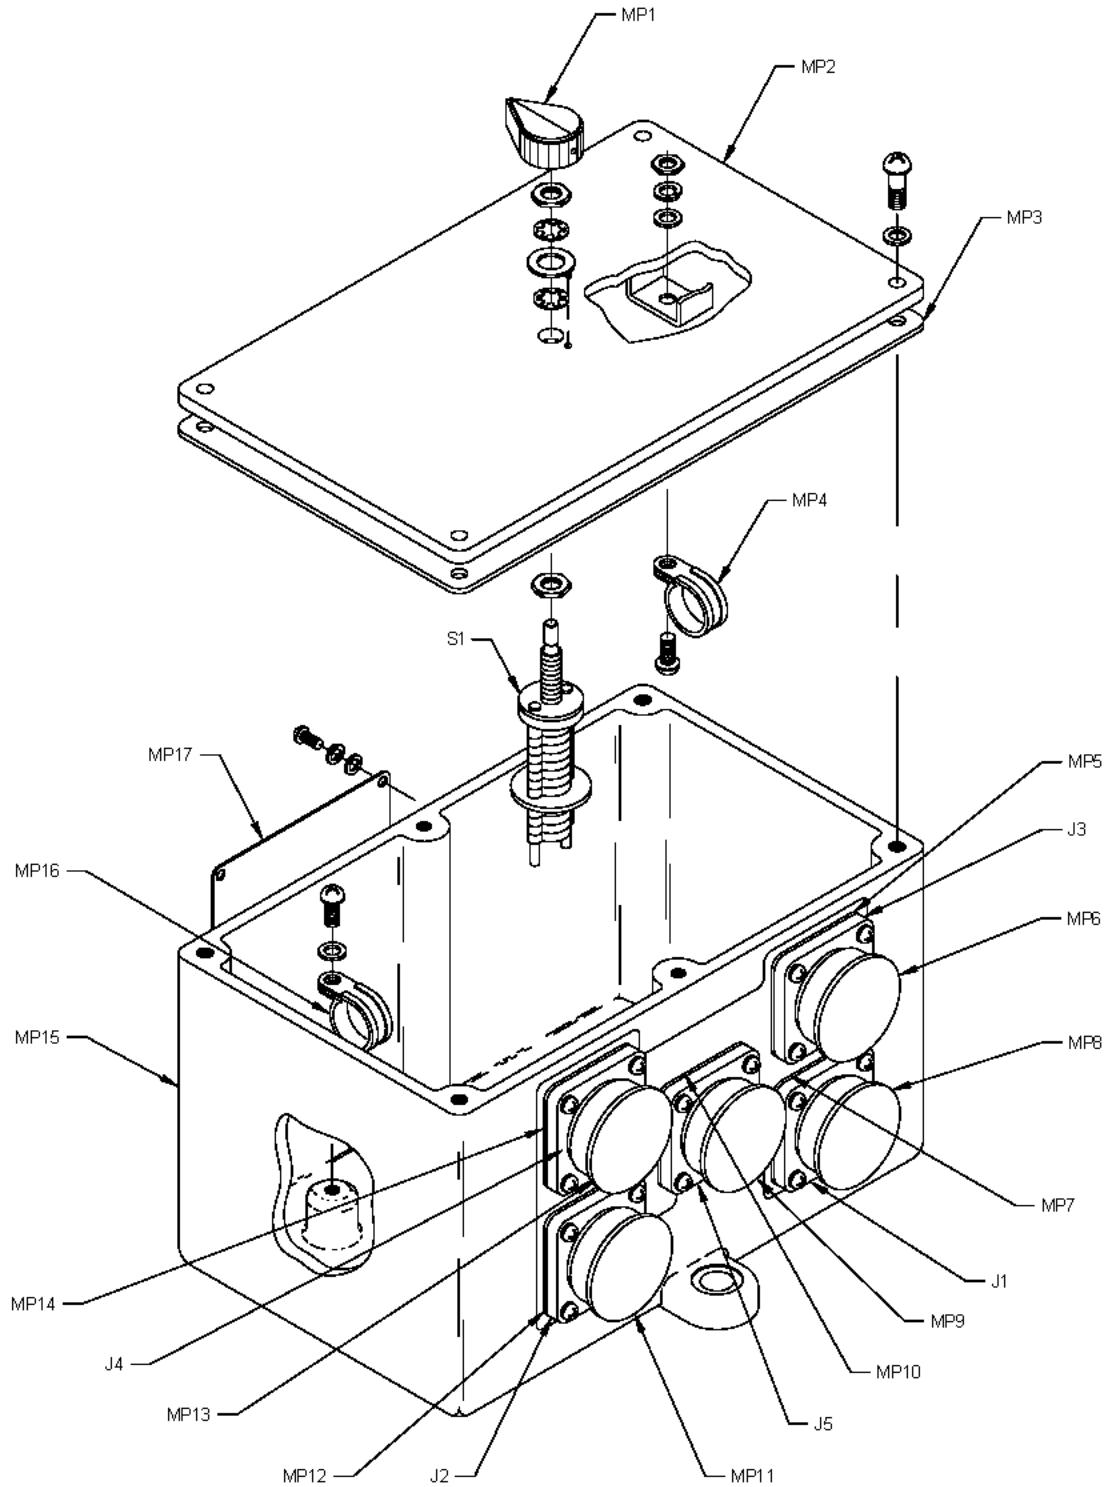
Rodmeter Switching Unit (Unit 5), Exploded View
